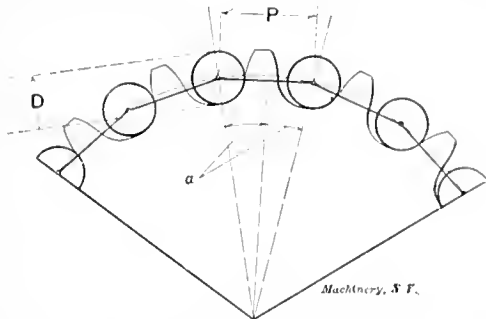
For obtaining Pitch, Bottom and Outside Diameter of a Roller Chain Sprocket.
